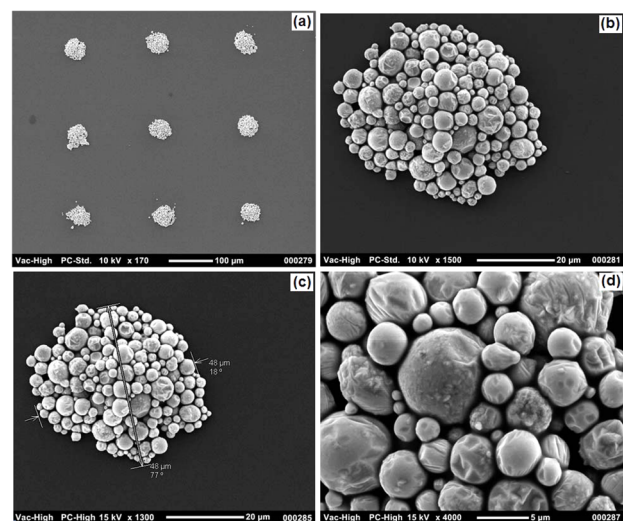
(a) Typical view of solder paste deposits with measurements (top view), (b) a single solder paste deposit (top view), (c) solder paste deposit with measurement, and (d) solder particles in the solder paste deposit. The paste diameter has been measured at different locations due to the oval shape of solder pastes and averaged out.
